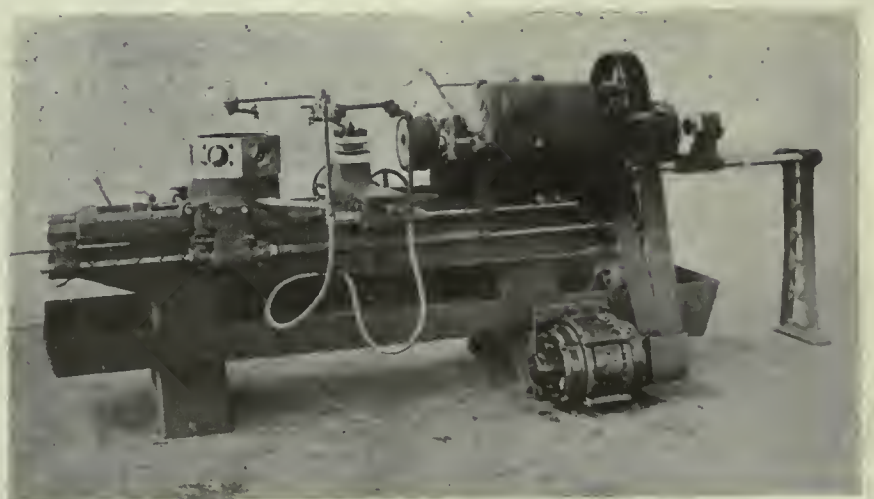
REAR VIEW OF 2-B UNIVERSAL TURRET LATHE WITH AUTOMATIC CHUCK AND MOTOR DRIVE
